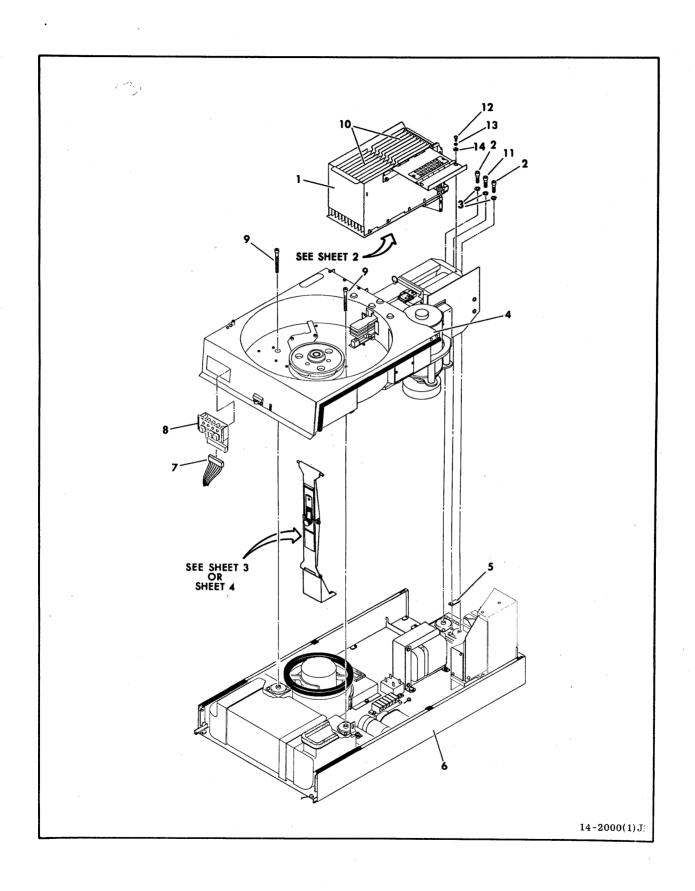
Drive Electronics Assembly (Sheet 1 of 4) 83322150 W
